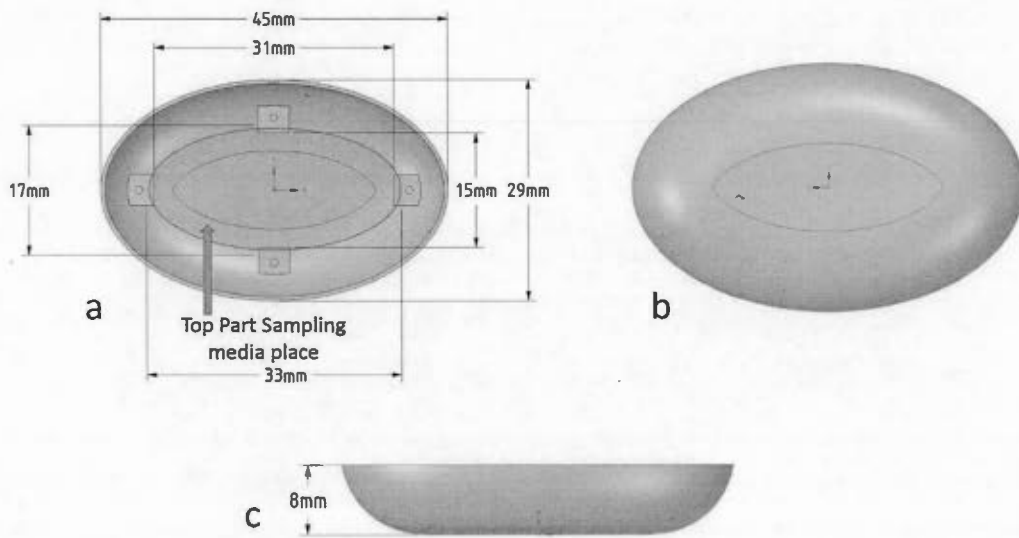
PAS sixth concept design top part. (a) Top view. (b) Bottom view. (c) Side view
